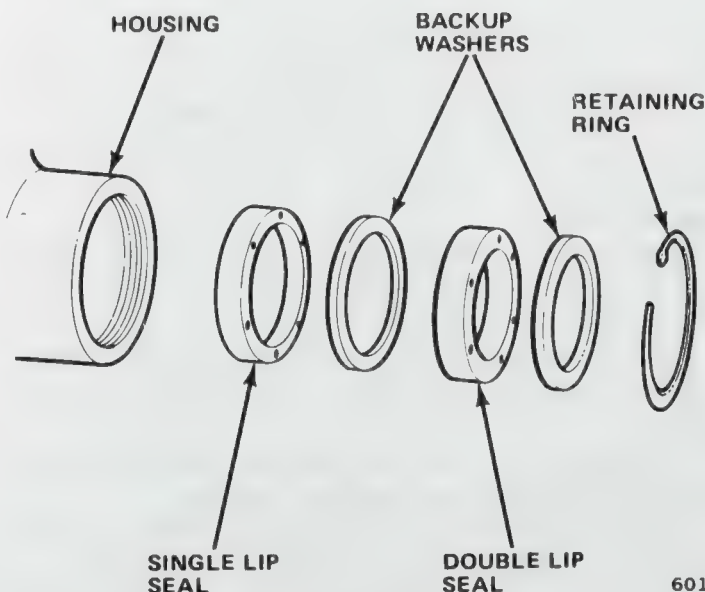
K-8 Pitman Shaft Seal Assembly Sequence
